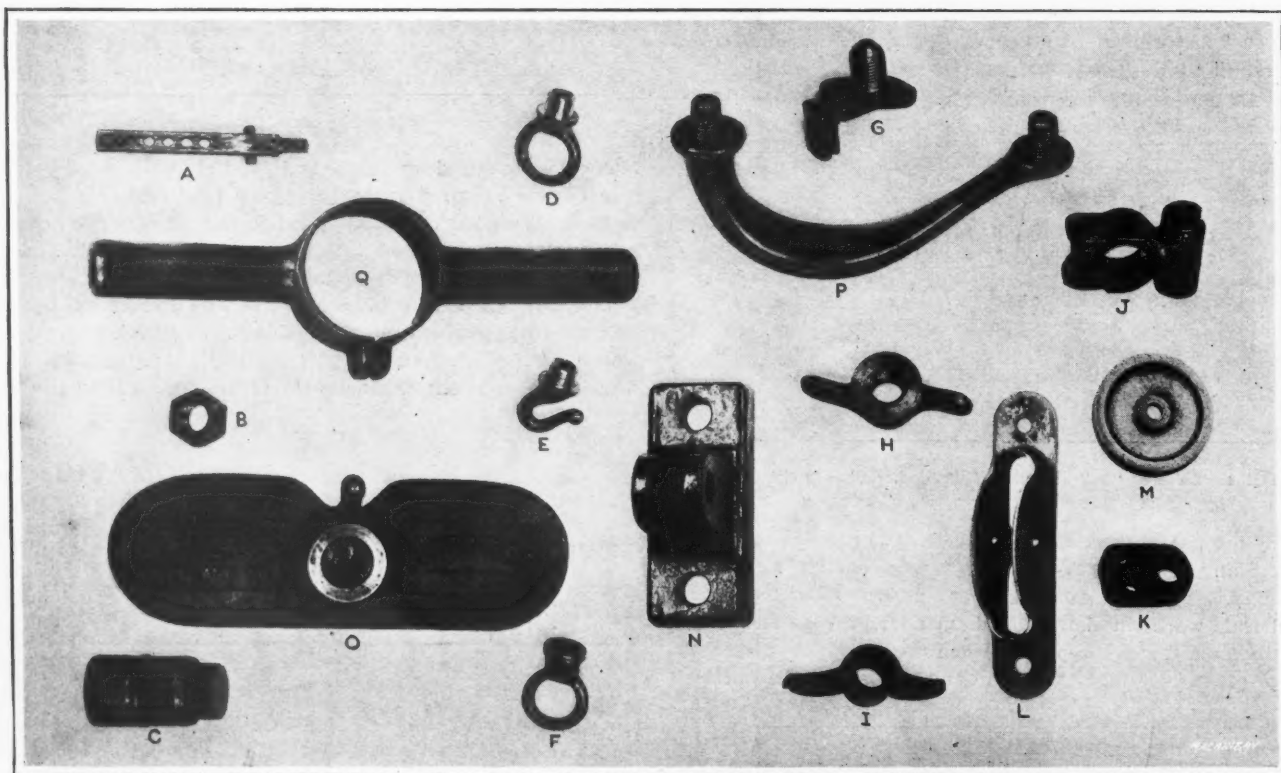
Various Parts produced on the Machine illustrated in Fig. 1
